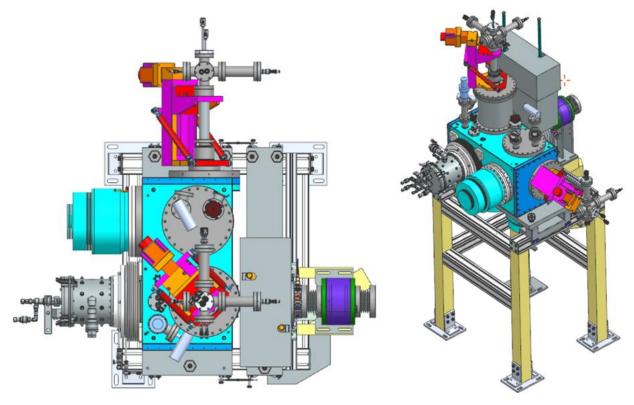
CAD models for LEBT Girder 1E (left) and 1W (right)
